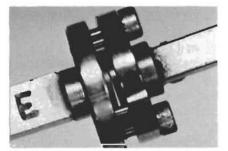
Improper alignment caused by uneven pressure on the flange securing screws.
